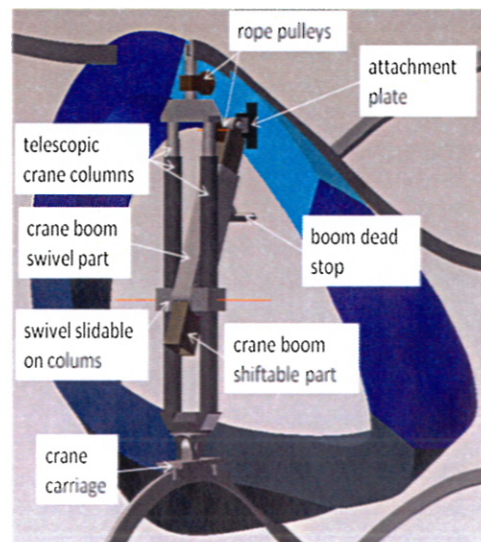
In-vessel crane removing segment 1 of ring 3.
